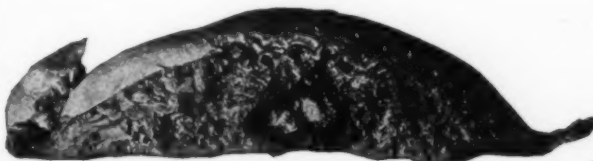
Sample No. 0, Fracture of Calumet & Hecla Copper. Set copper, contains 5.76 per cent Cu_2O . (Magnified 1.5 diam.)
